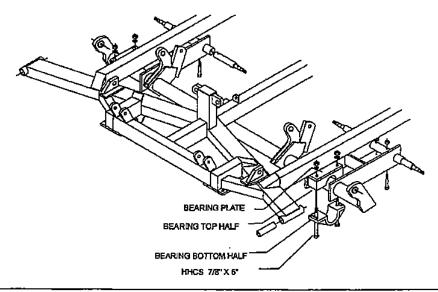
WHEEL LIFT BEARING ASSEMBLY
